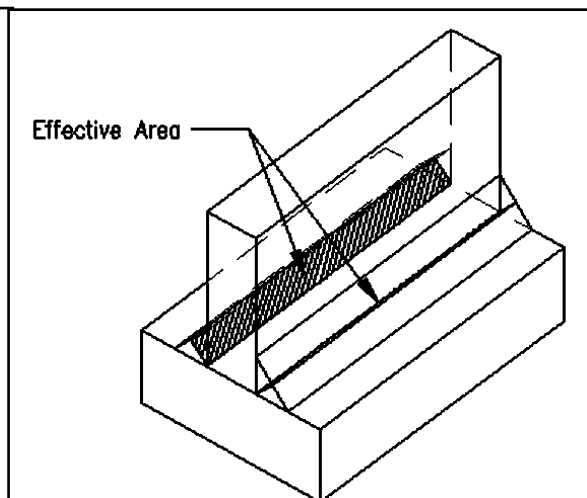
Effective Area of Fillet Welds
